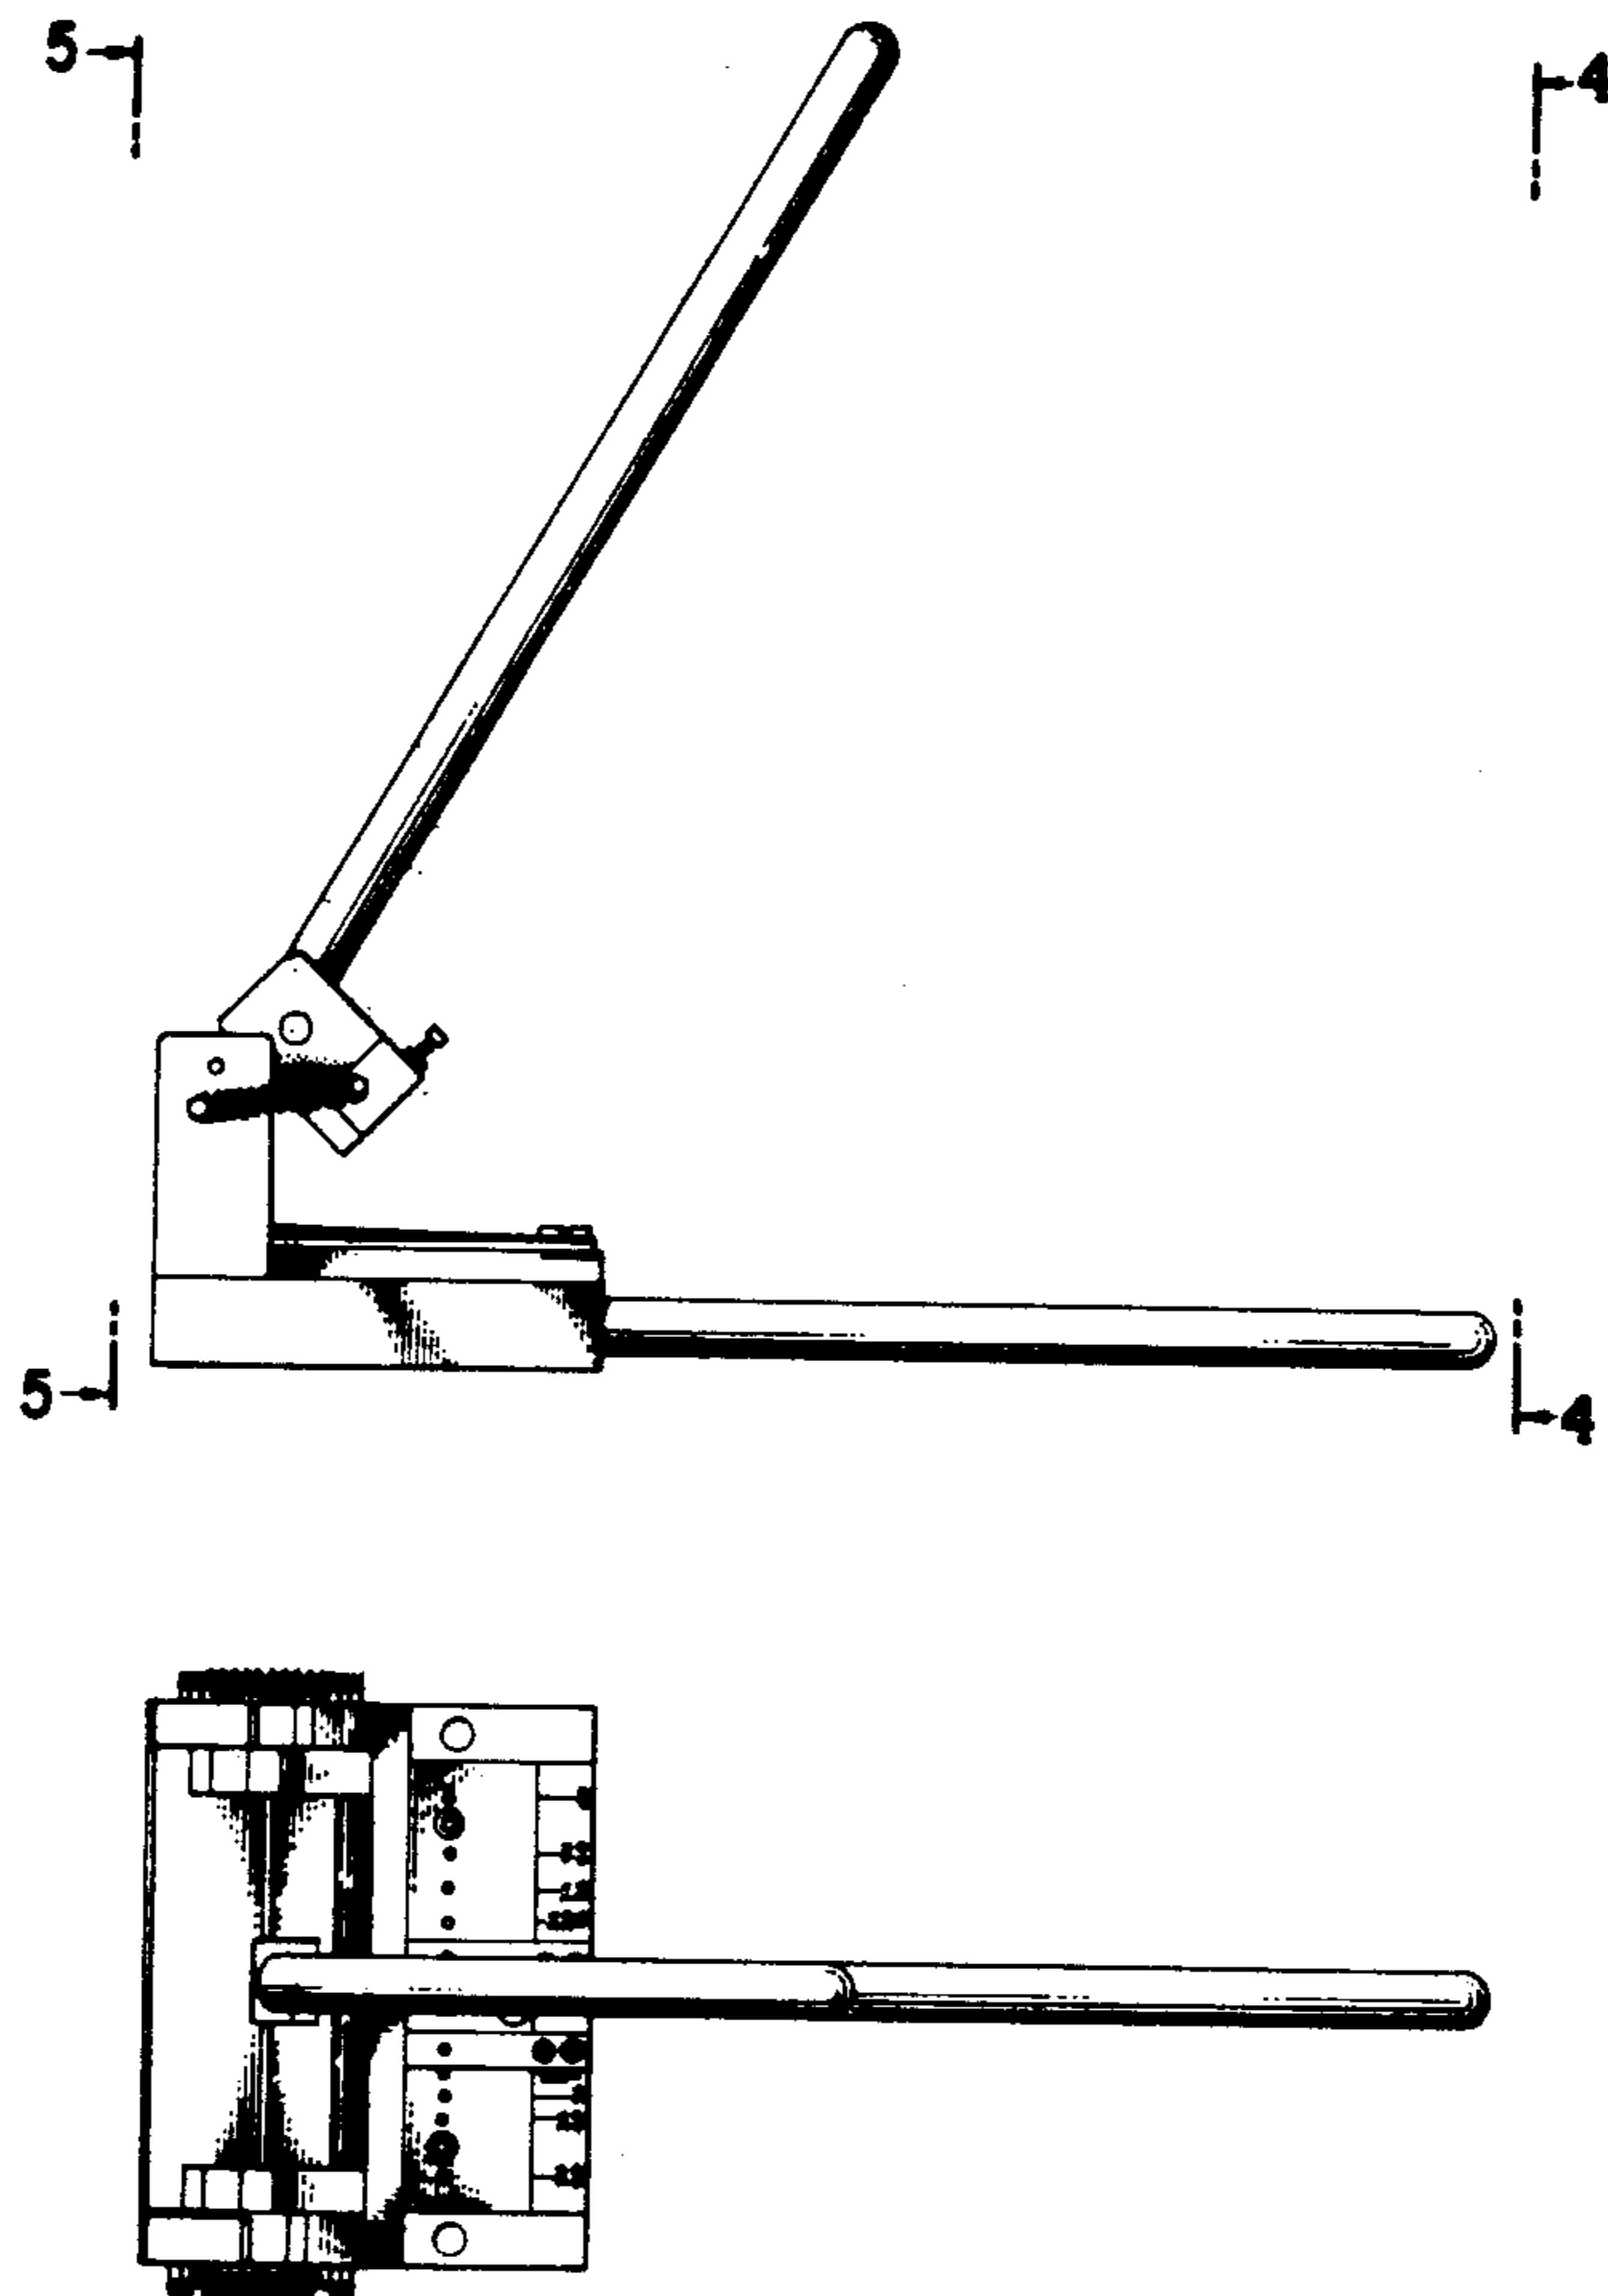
is a front elevational view of a multi-contact electrical connector fixture press showing our new design;
